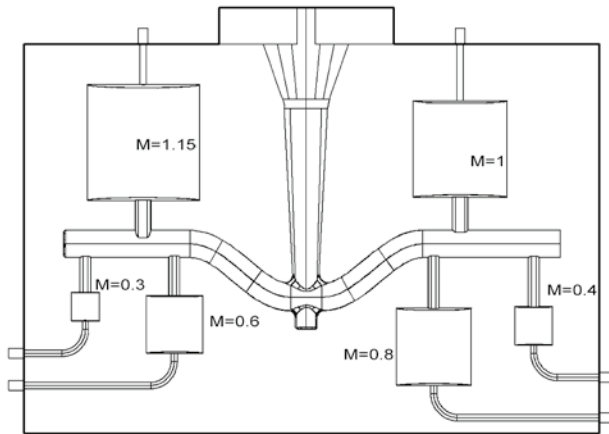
Schematic of metal moulds used for the cylindrical test samples (The design was similar to the sand moulds)
